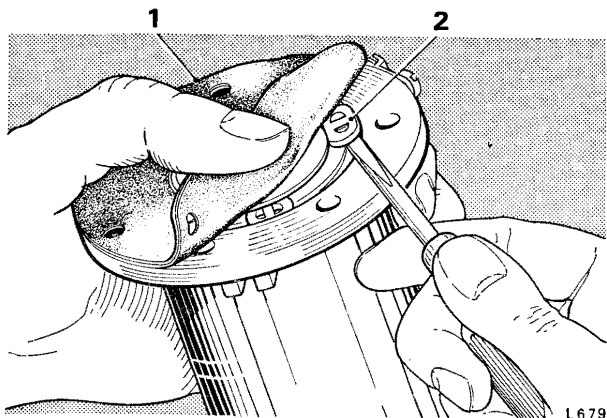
REMOVING THE NYLON ARMATURE GUIDE PLATE
